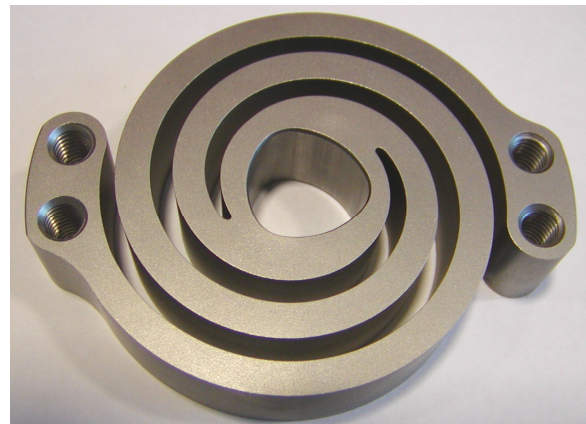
Double spiral spring. The inner bore shows a P3G-polygone profile.
